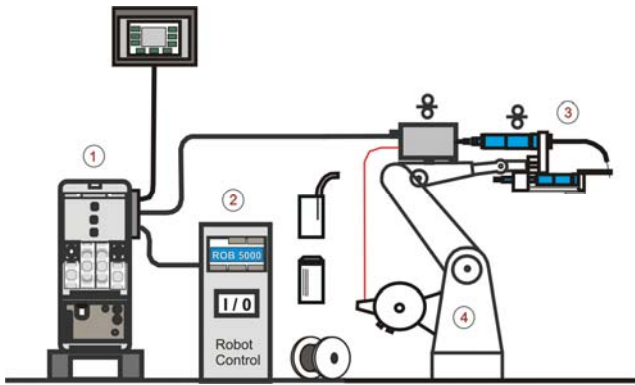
Robot with integrated laser welding equipment layout
